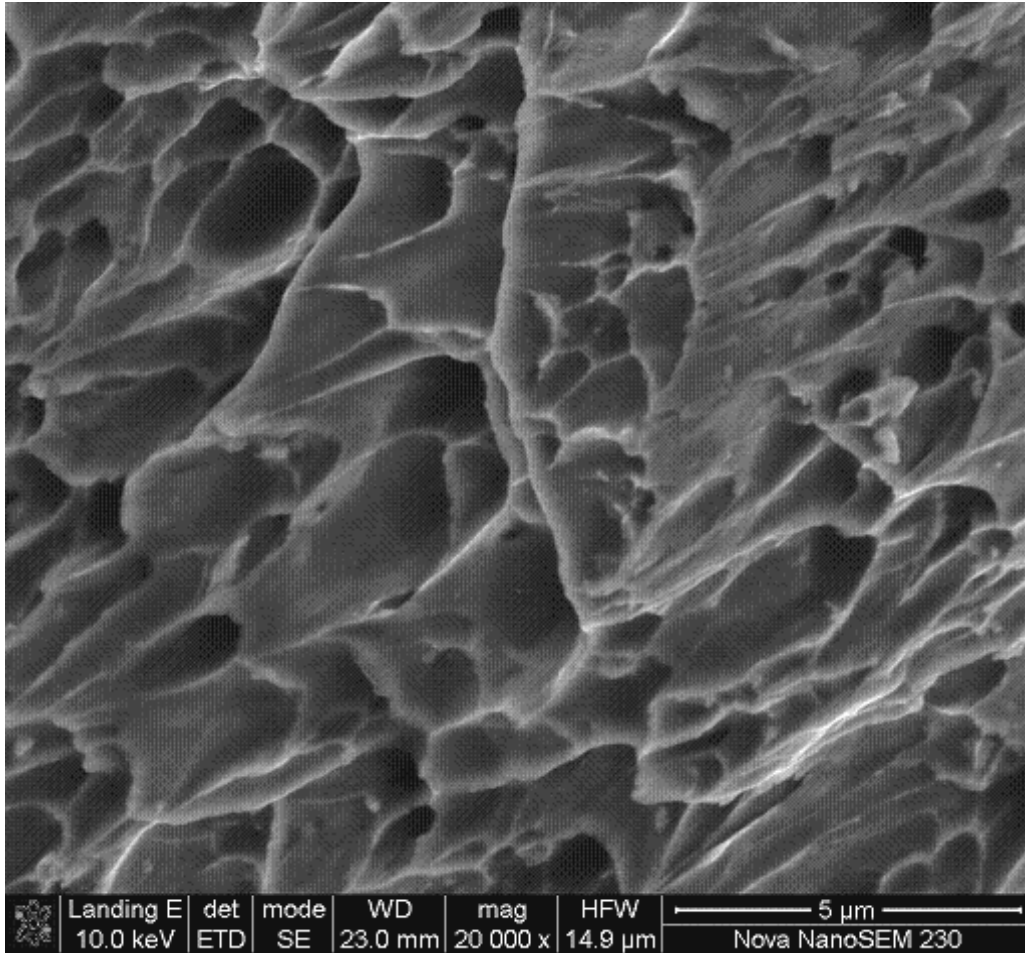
Fractograph of back plate tested at a charge mass of 33g, ( $I=63.7$  Ns), shows elongated dimples (shear component to failure)
